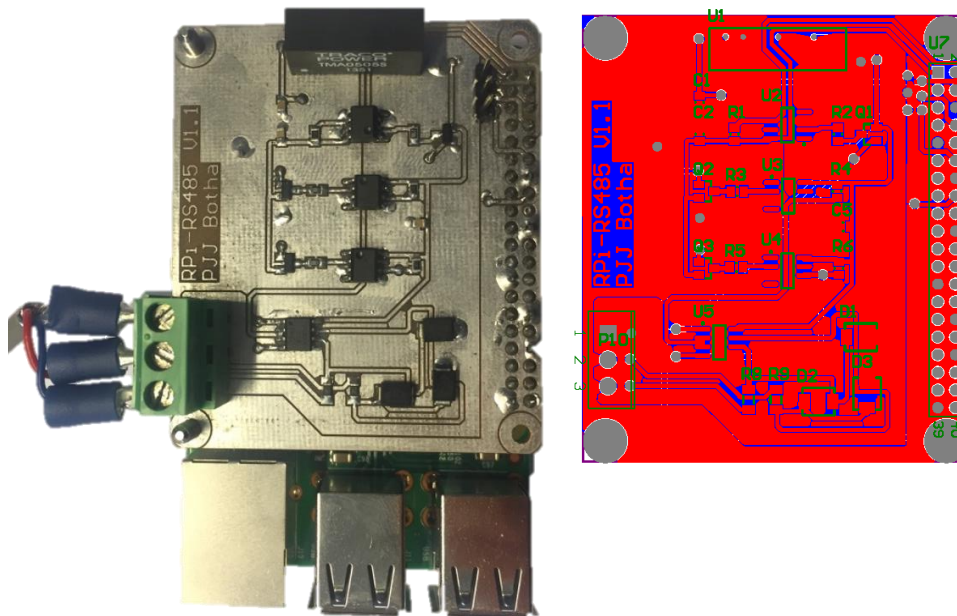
Photo of the breakout board on the Raspberry Pi and the PCB layout
